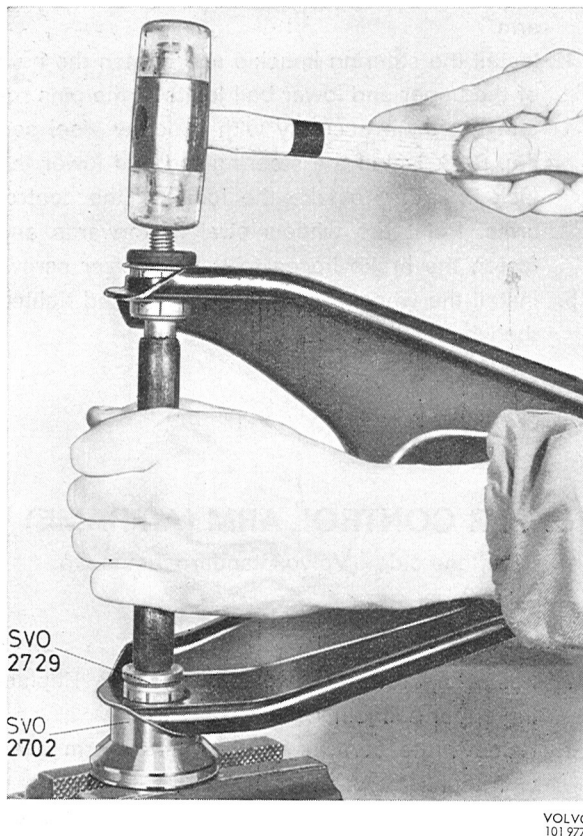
Removing control arm shaft. 2. Driving out shaft
